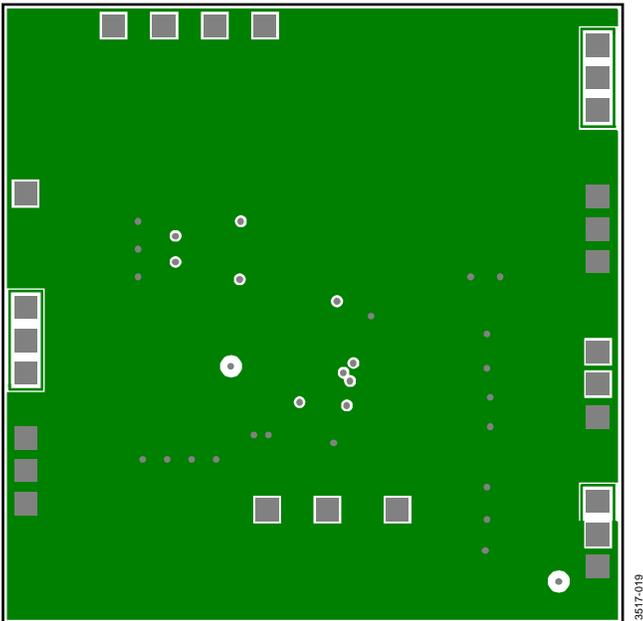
ADP1974 Evaluation Board PCB Inner Layer 2
